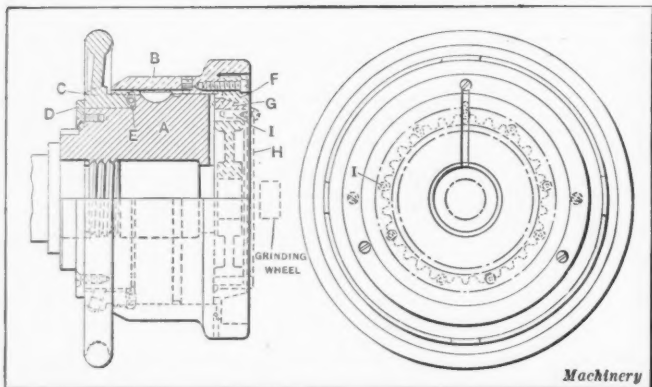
Details of Spur Gear Chuck shown in Fig. 18, designed by the Heald Machine Co.
